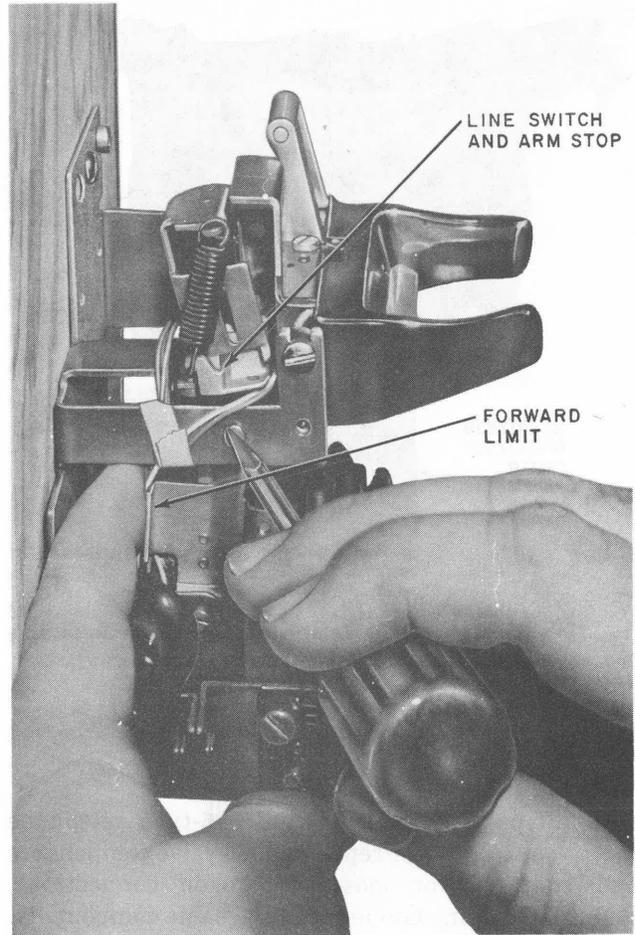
D-180383 Kit of Parts, Installed on 526-Type Telephone Set Base
